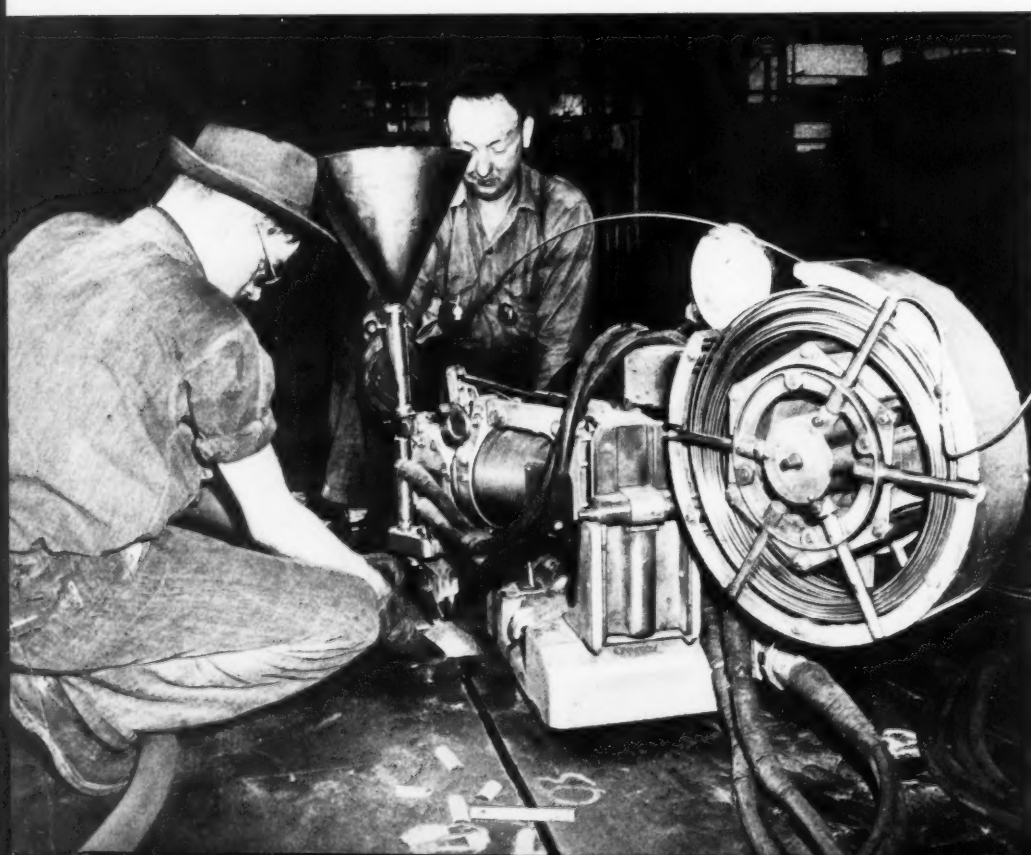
Joining the Top Plate of Inner Bottoms by Means of the Unionmelt Welding Process
